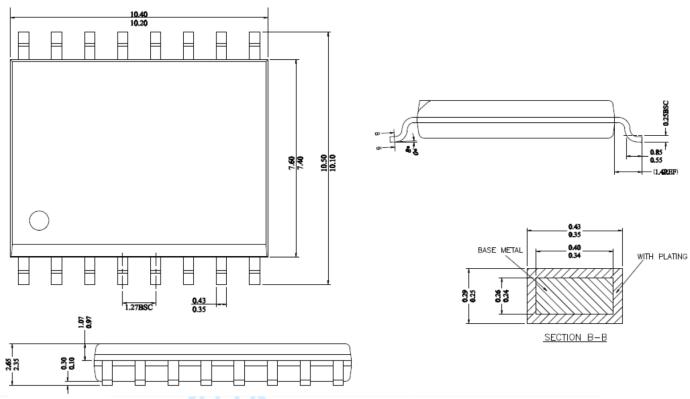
16-Lead Wide Body SOIC [WB SOIC-16] Package—dimension unit(mm)
